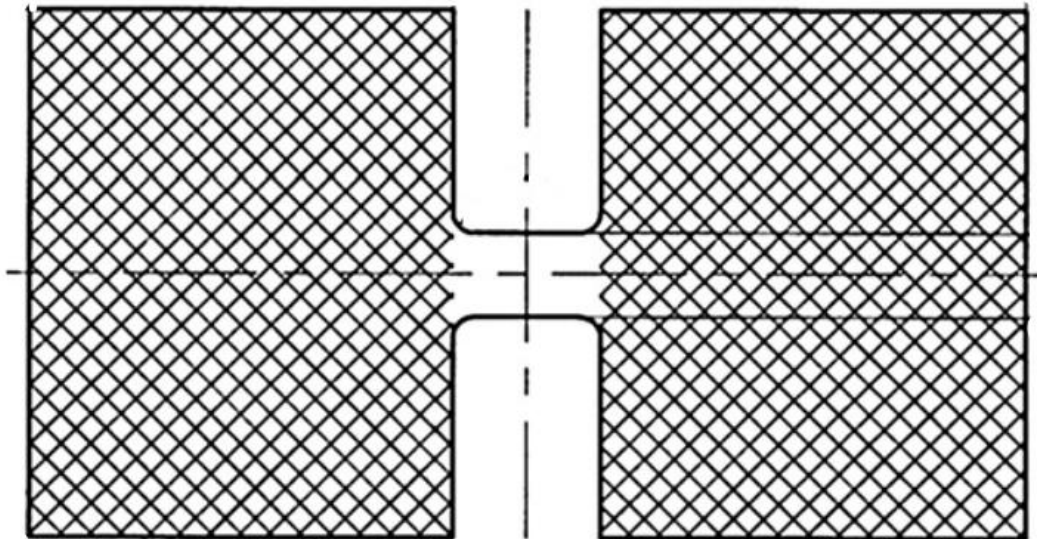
A general drawing of the specimen for the tensile test (Peirs, Verleysen, Paepegem, & Degrieck, 2011)
